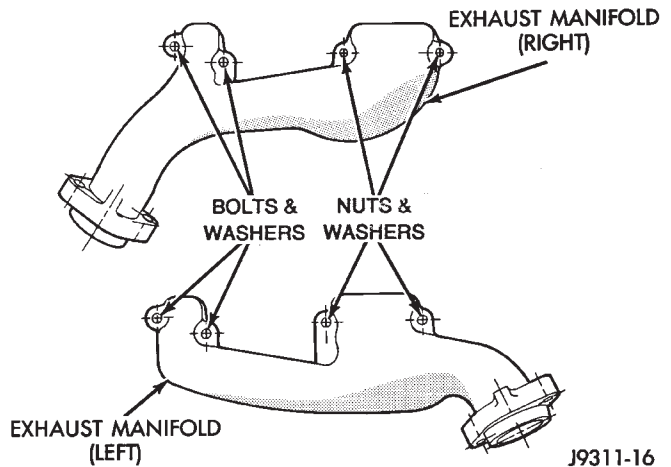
Exhaust Manifold Installation—3.9L Engines
